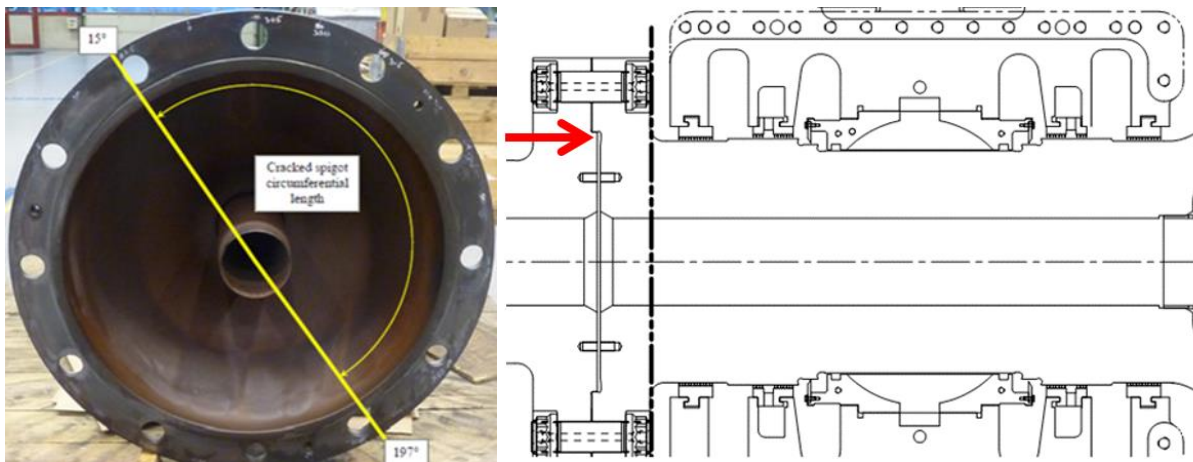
Rotor crack detected in Turbine near the bearing 2 at the marriage joint.
